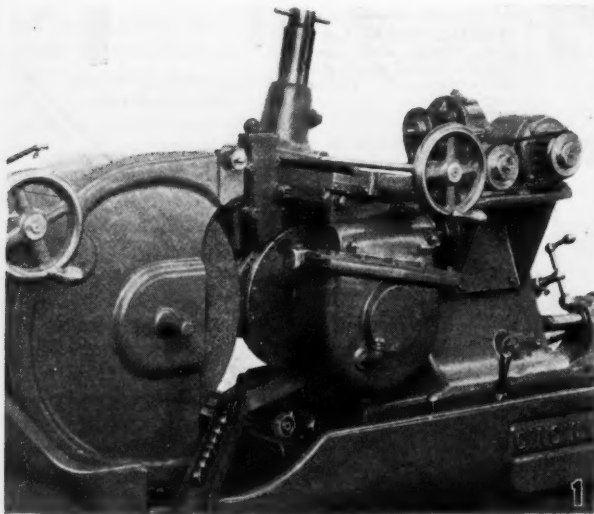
Grinding 3,200 castor rollers per hour in a Centerless grinding machine equipped with a cage fixture and both receiving and discharging chutes. The only duty of the operator is the loading of the chute. Fig. 2—View and dimensions of the roller.
